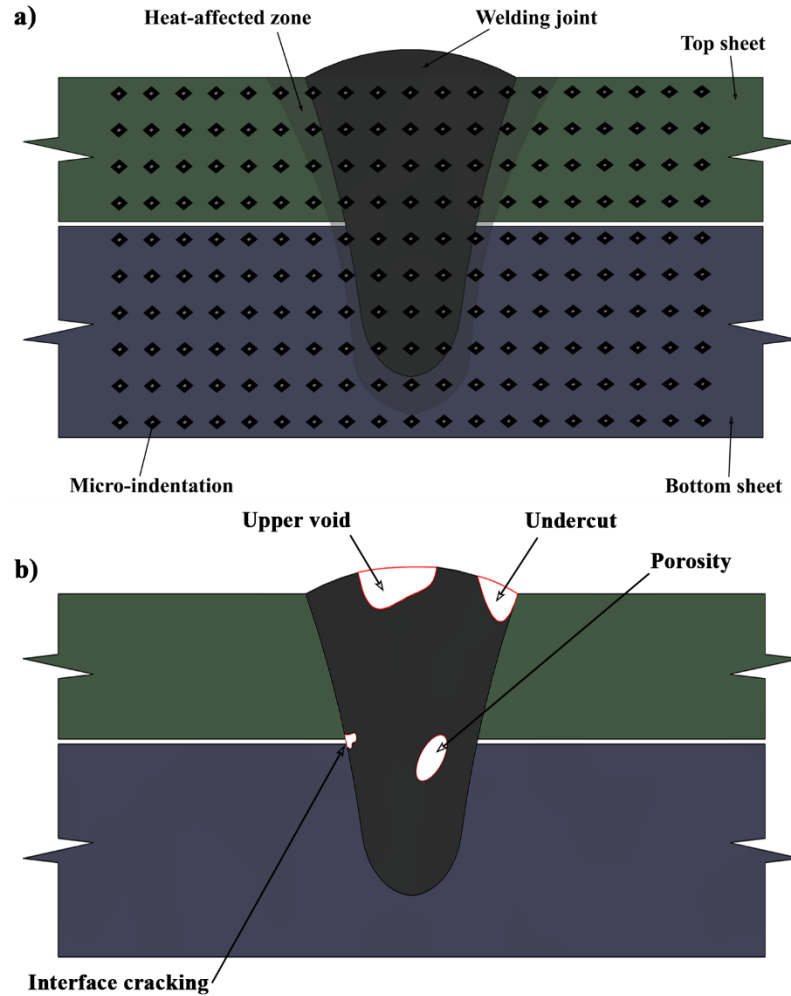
a) Schematic of micro-indentation pattern and hardness measurement of the weld cross and b) Geometric characteristic of welding
